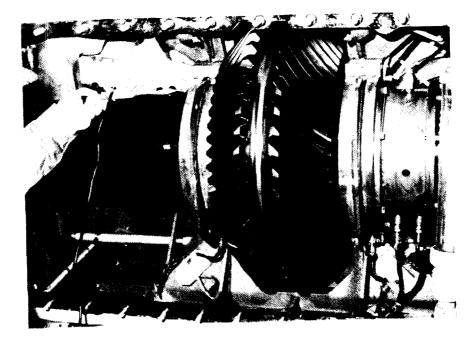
Tooth Contact Pattern: Starboard Lower Gears, at 268 Hours of Operation
